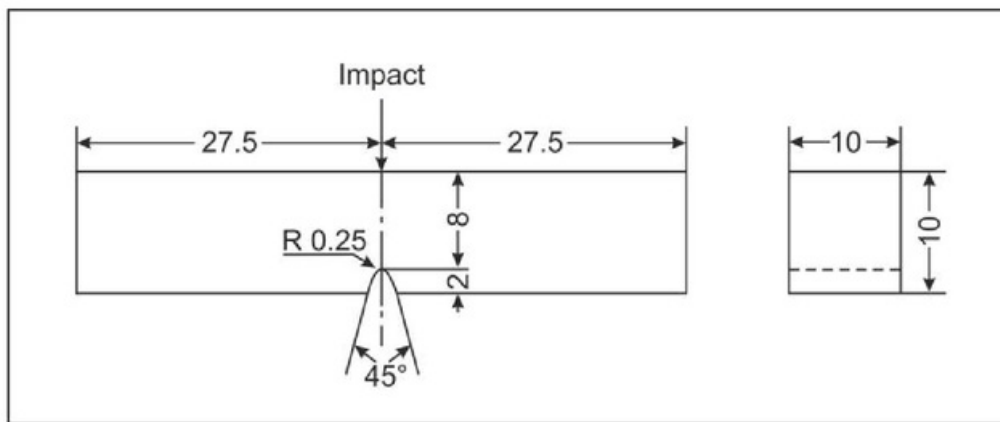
Charpy V-notch impact test specimen as per ASTM E23-12c specification (all dimensions in mm)
